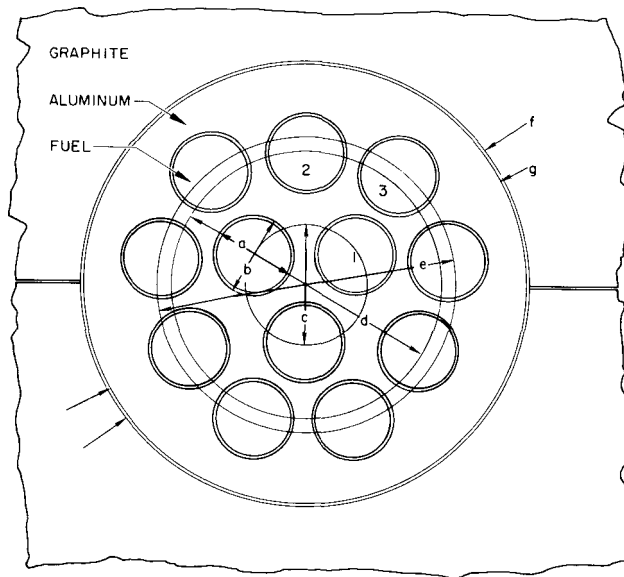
Cross Sectional View of Fuel Cluster With Dimensions
